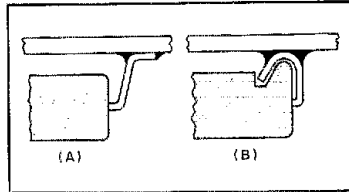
SMD lead variations. Gull-wing leads (A) are inspected easily; they can be accessed with test probes. The J-shaped counterparts (B) have a smaller PC-board footprint and are handled easily by automatic feeding machines.
